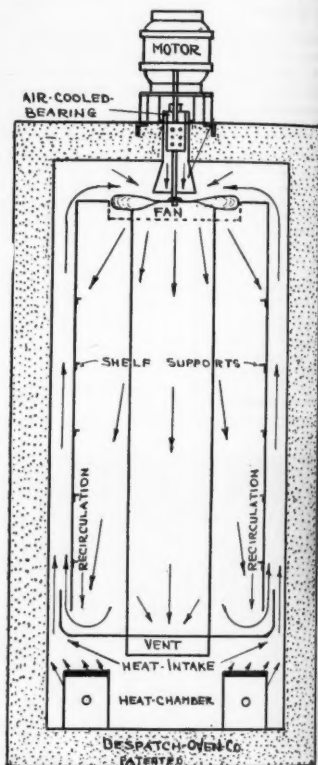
Cross-section drawing of Despatch Convected Air Tempering Furnace, showing travel of air.
